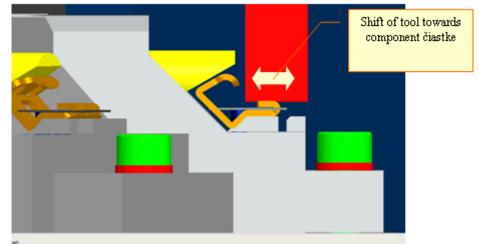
Fixation - shift of tool toward component, required position Bottom edge centre with tool - it is the most important correction of tool position of this
